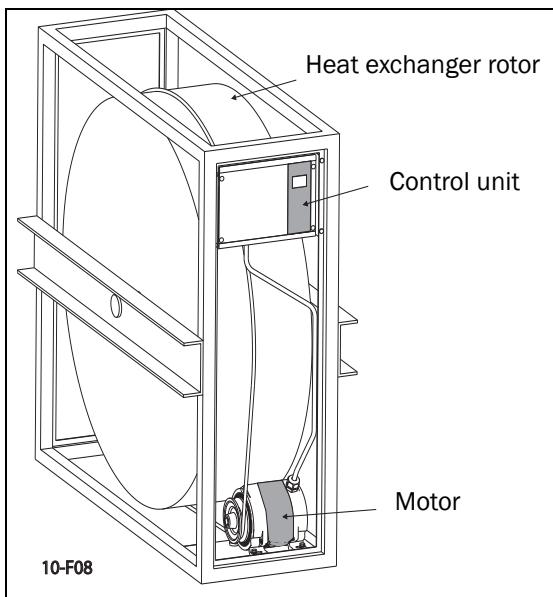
Emotron Motor and Control unit for rotary heat exchangers.
